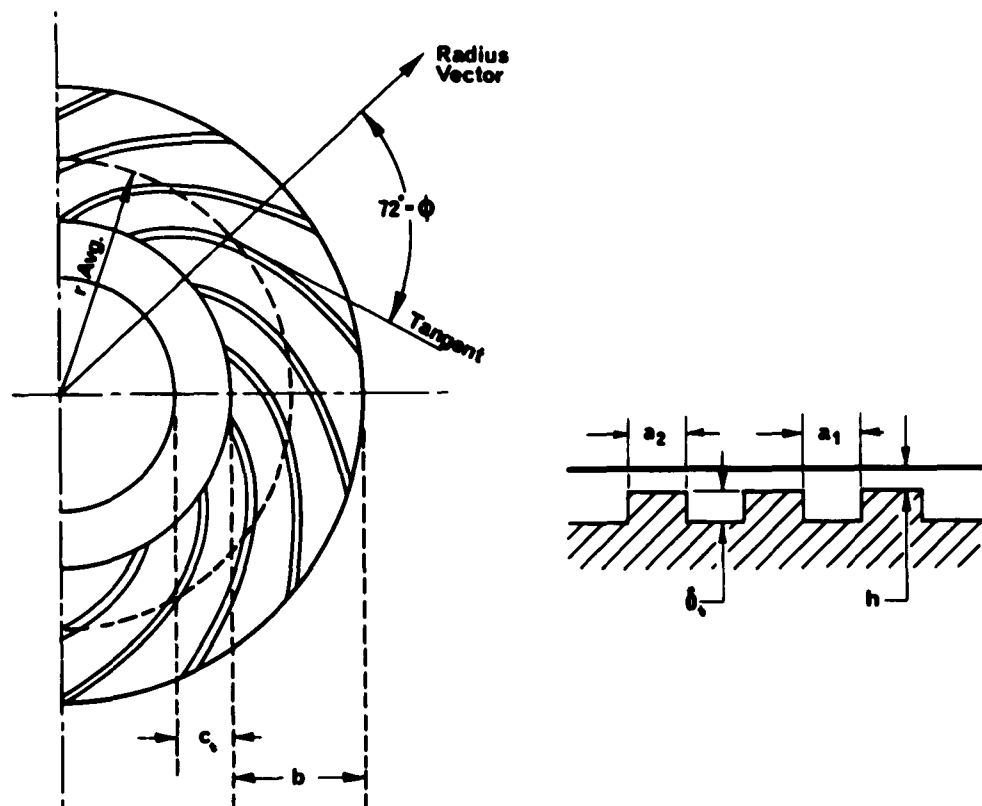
Optimized Configuration for Spiral-Grooved Pumping Plate. (37).
